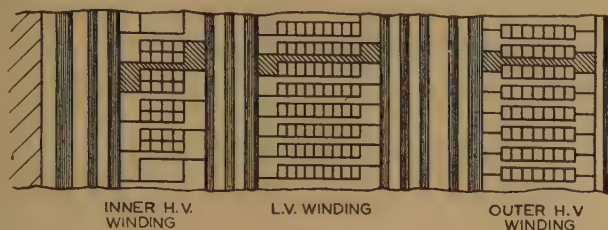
Cross-section of windings showing 'bridge' construction.
